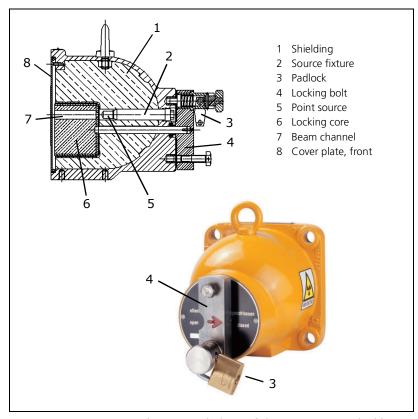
Cross-section drawing and photo of the point source shielding, top: beam channel open, bottom: beam channel closed
